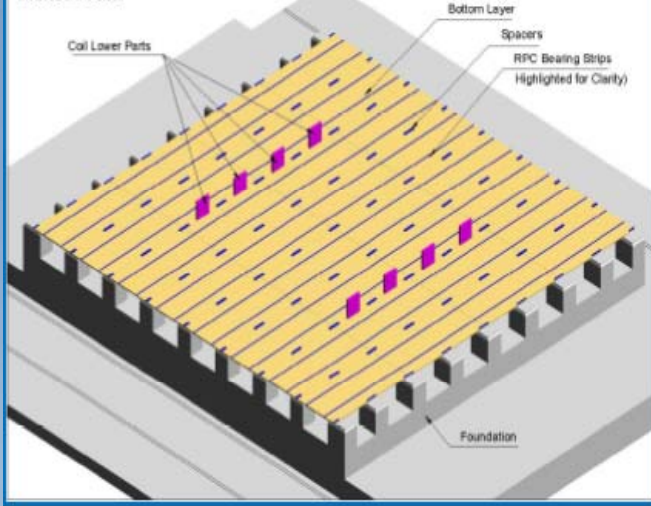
Building up the Stack with Plates, Spacers, Bearing Strips and Coil Parts
